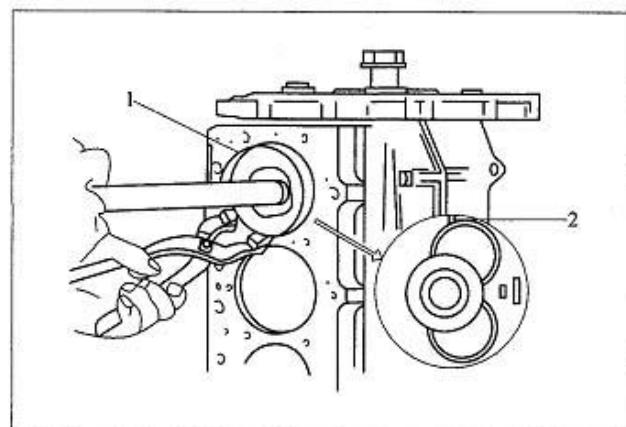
Reassembling Piston with Special Piston Rings Compressor
